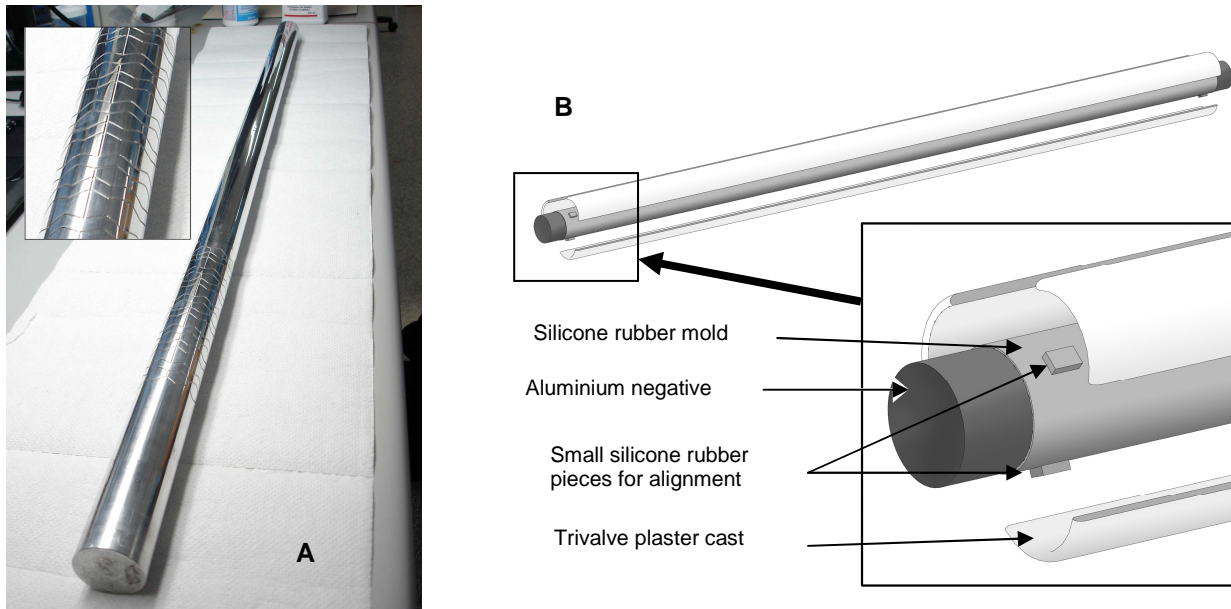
A) Aluminium negative. Inset shows stent strut pattern. B) Schematic of silicone rubber on aluminium negative, inside the trivalve plaster cast. The latter is displayed in exploded view.
